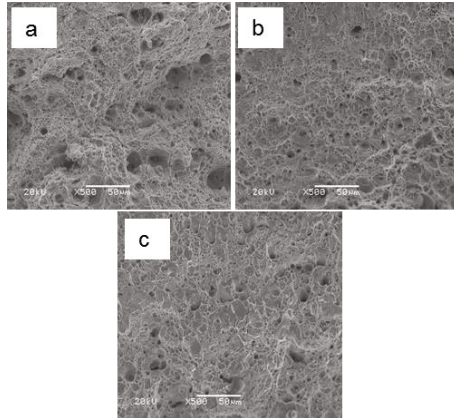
Tensile fracture morphology of the sample aged at 600 °C for 1h (a), 2h (b) and 5h (c)
